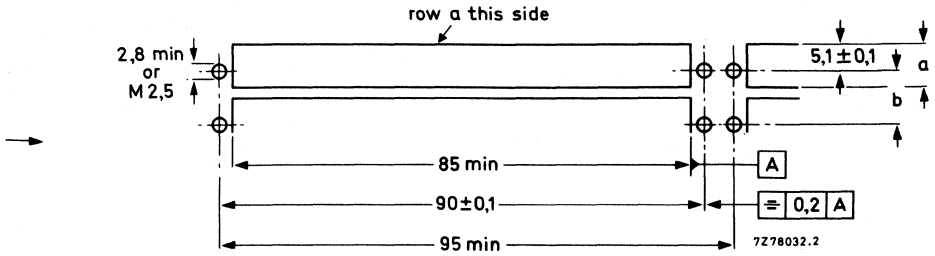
Panel cut-out; see Table 4 for dimensions a and b.
